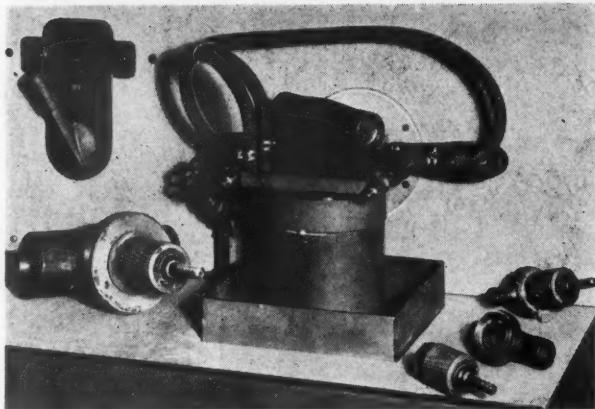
Coil and Fixture for Silver-Brazing Soft-Soldered Sylphon Bellows in Steel and Monel Forgings.
